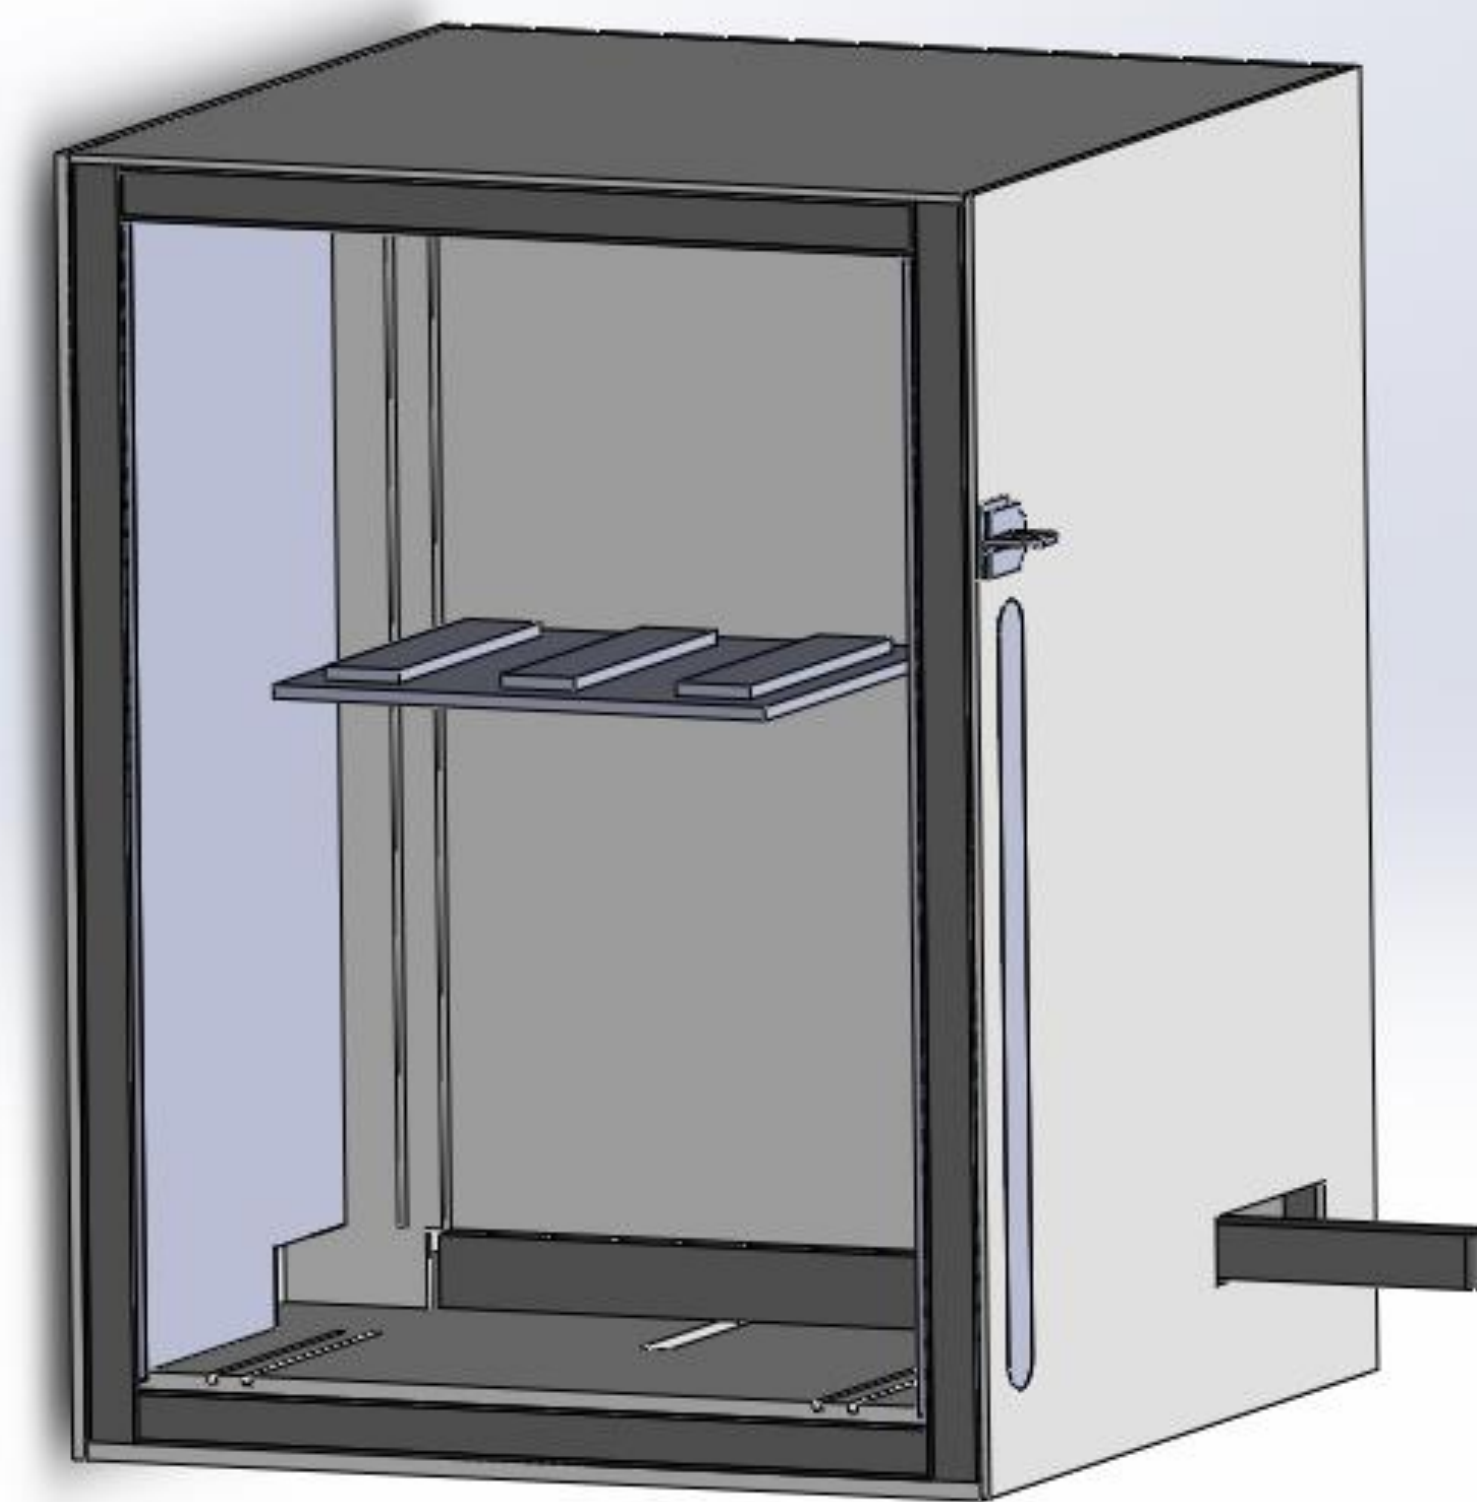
CAD drawing of the final design (inside mechanics) [2]
